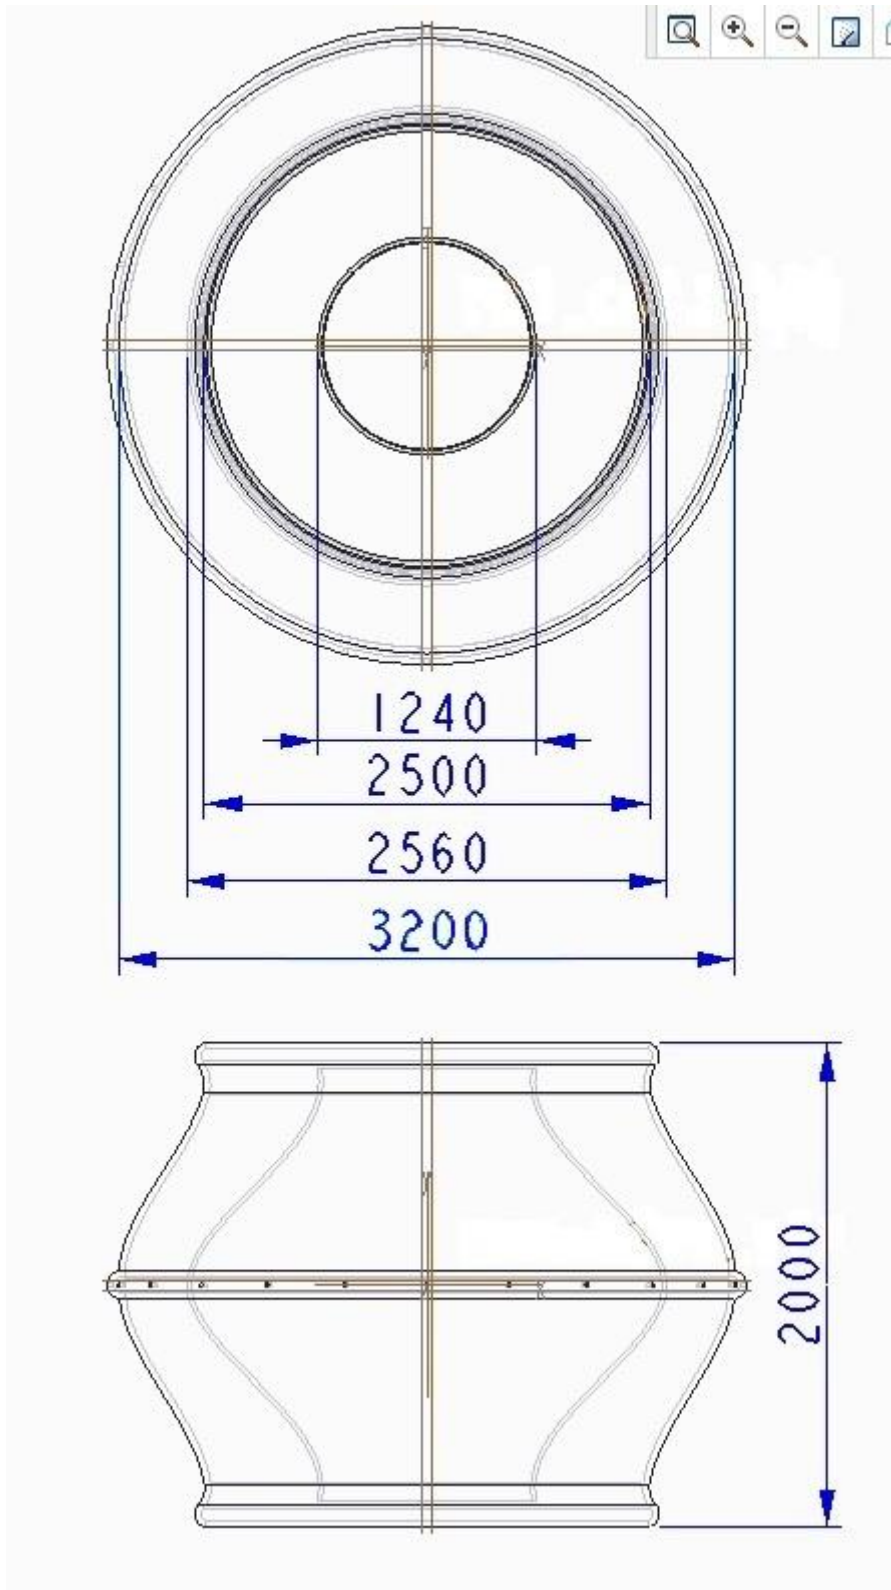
Dimensional Drawing of the Centrifugal Vessel
